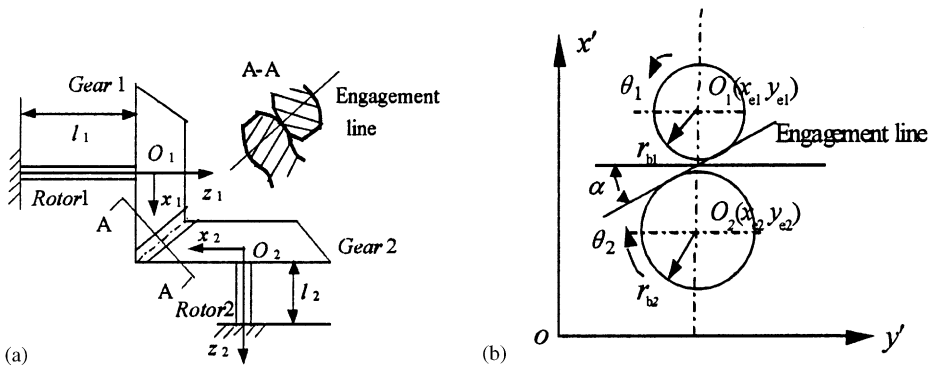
A simple rotor system geared by bevel gears and their virtual cylindrical gears of bevel gears.
